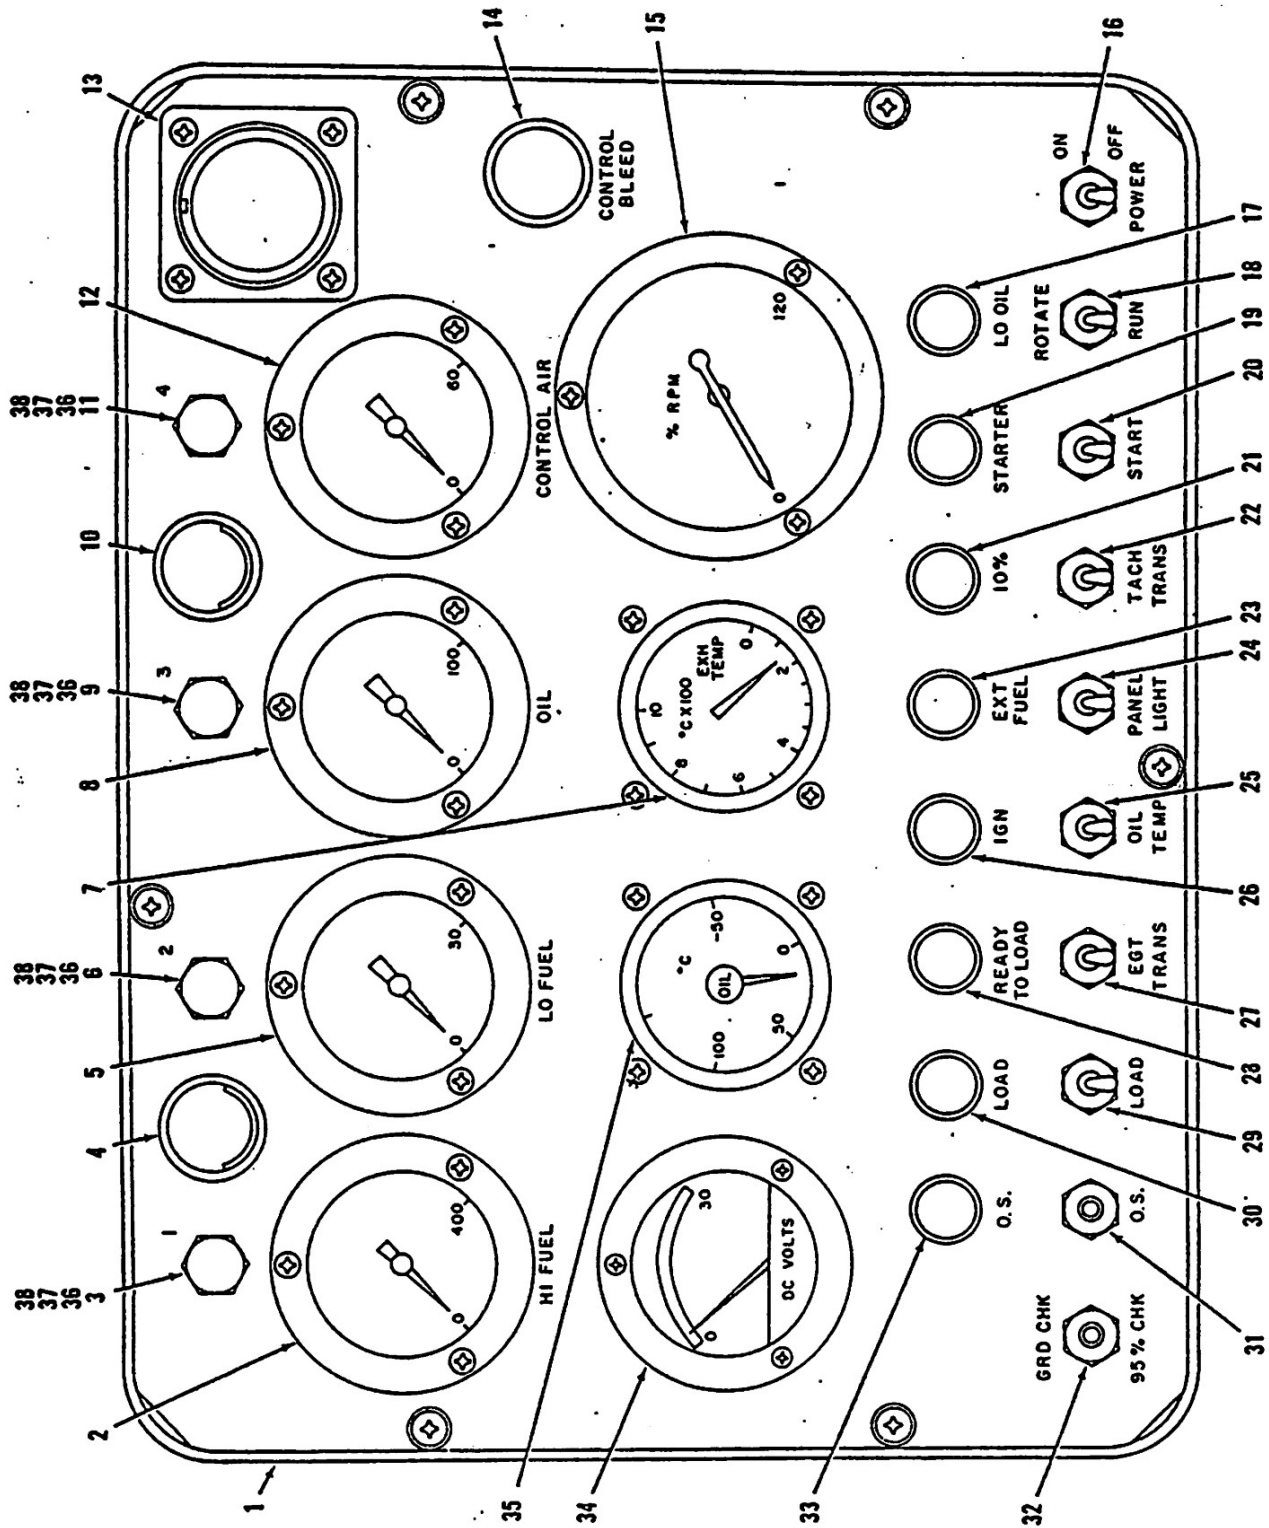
Typical Gas Turbine Engine Tester Assembly Panel
